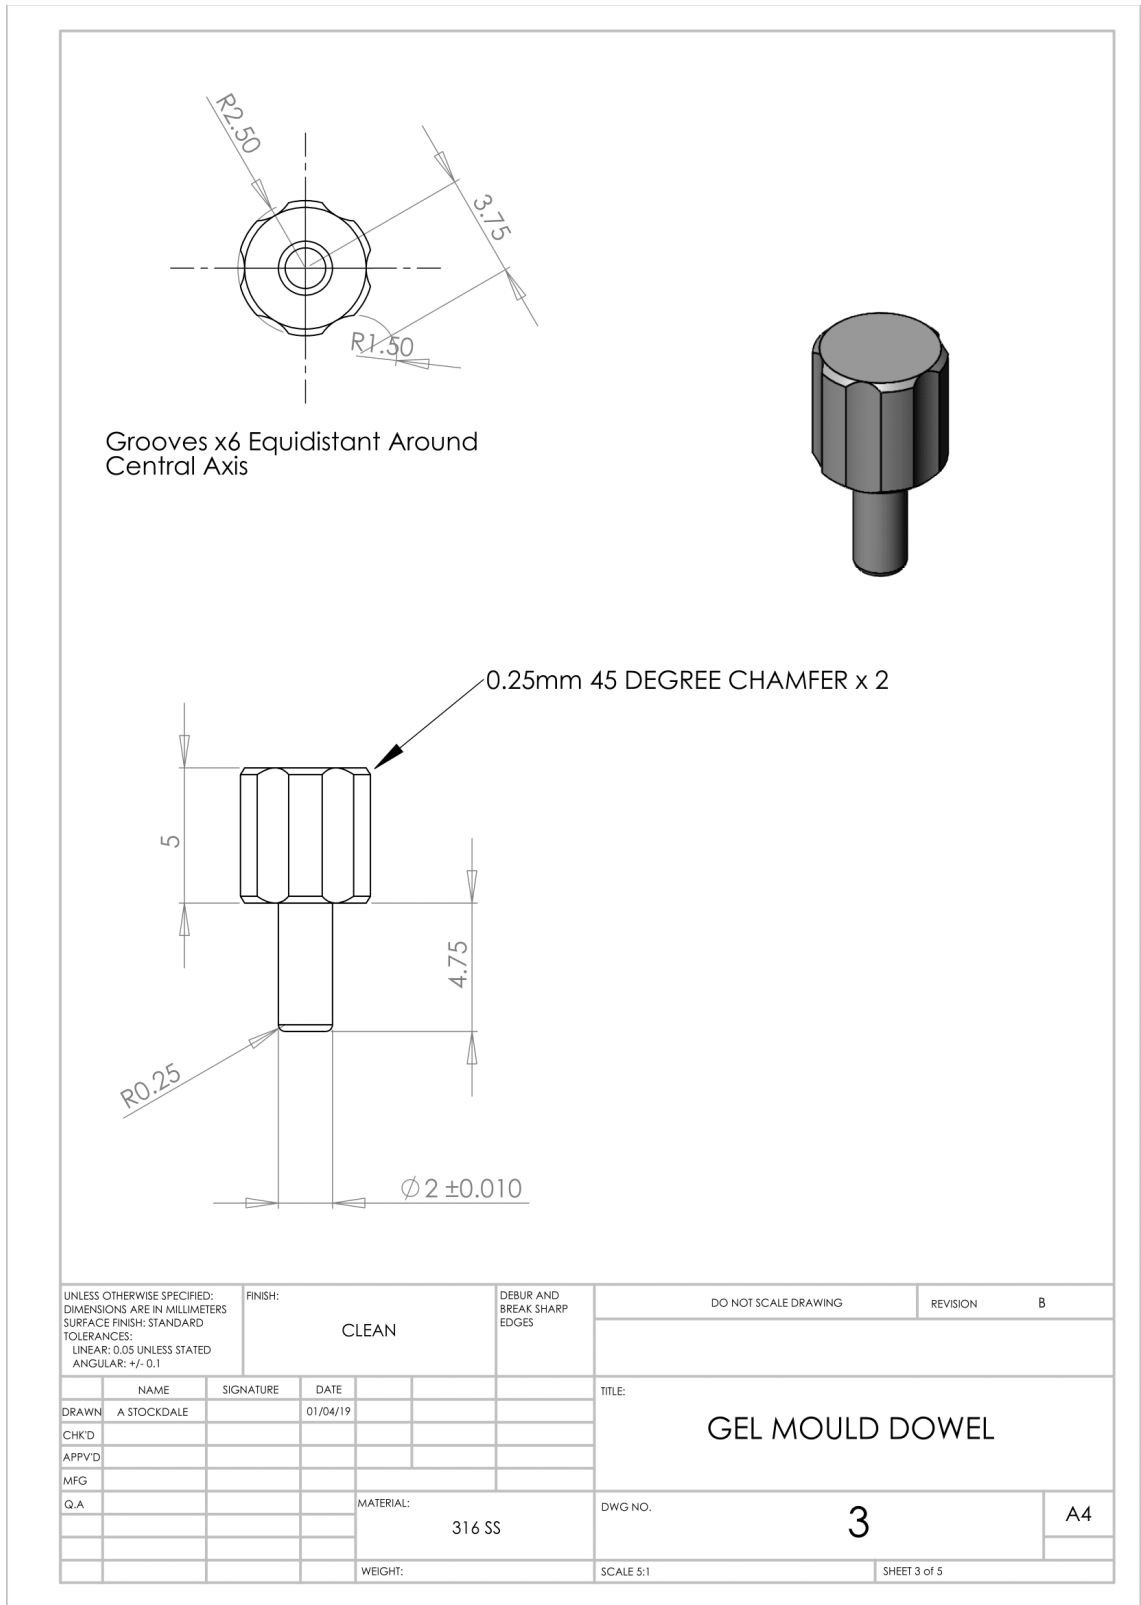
CAD drawing of the dowel piece of the distraction mould.
